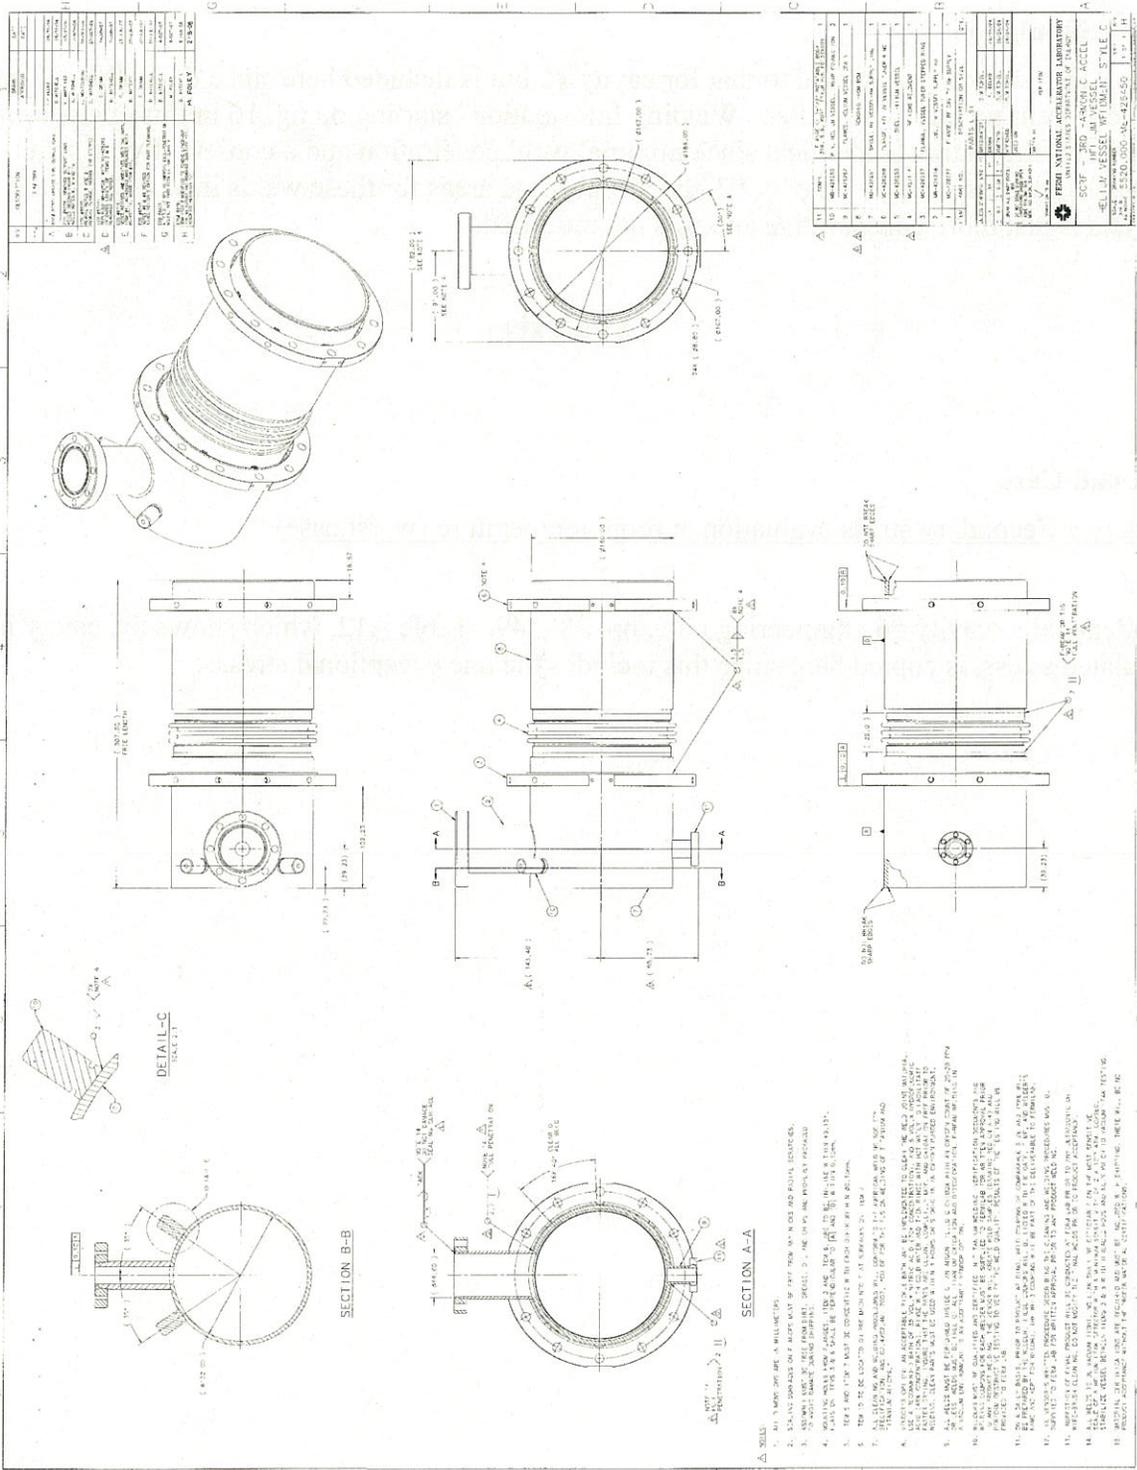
Helium Vessel Weldment for 3.9-GHz Dressed Cavity (Drawing 520.000-ME-426450)
